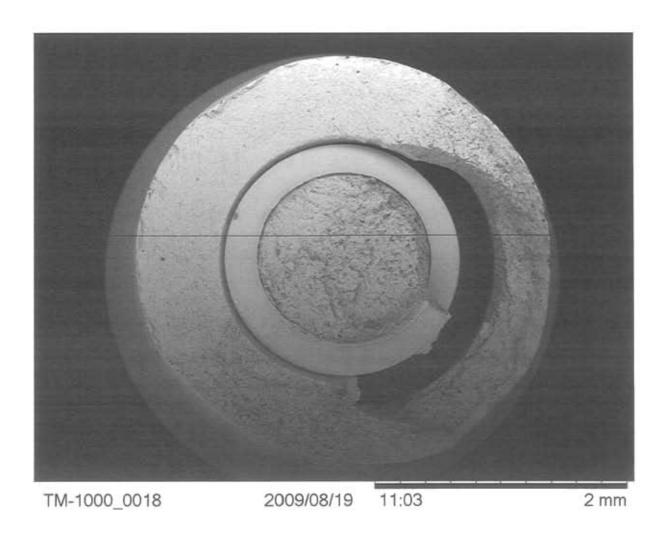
Fracture surface of abutment and implant (Lifecore #9).
